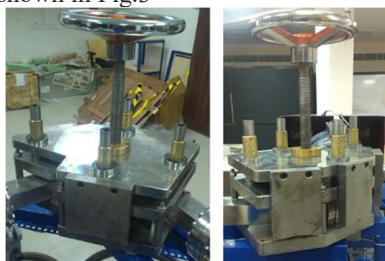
The Bending magnet assembly with wave guide (beam pipe). (Left/Right) front/ back view.
